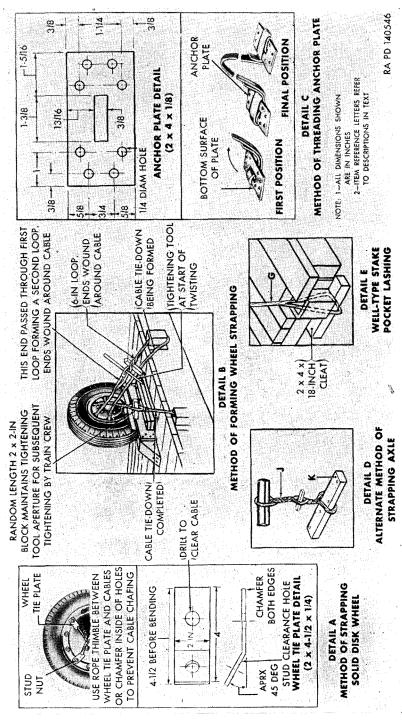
Method of blocking the 1½-ton, 2-wheel water tank trailer M106 for rail shipment—blocking detail.
